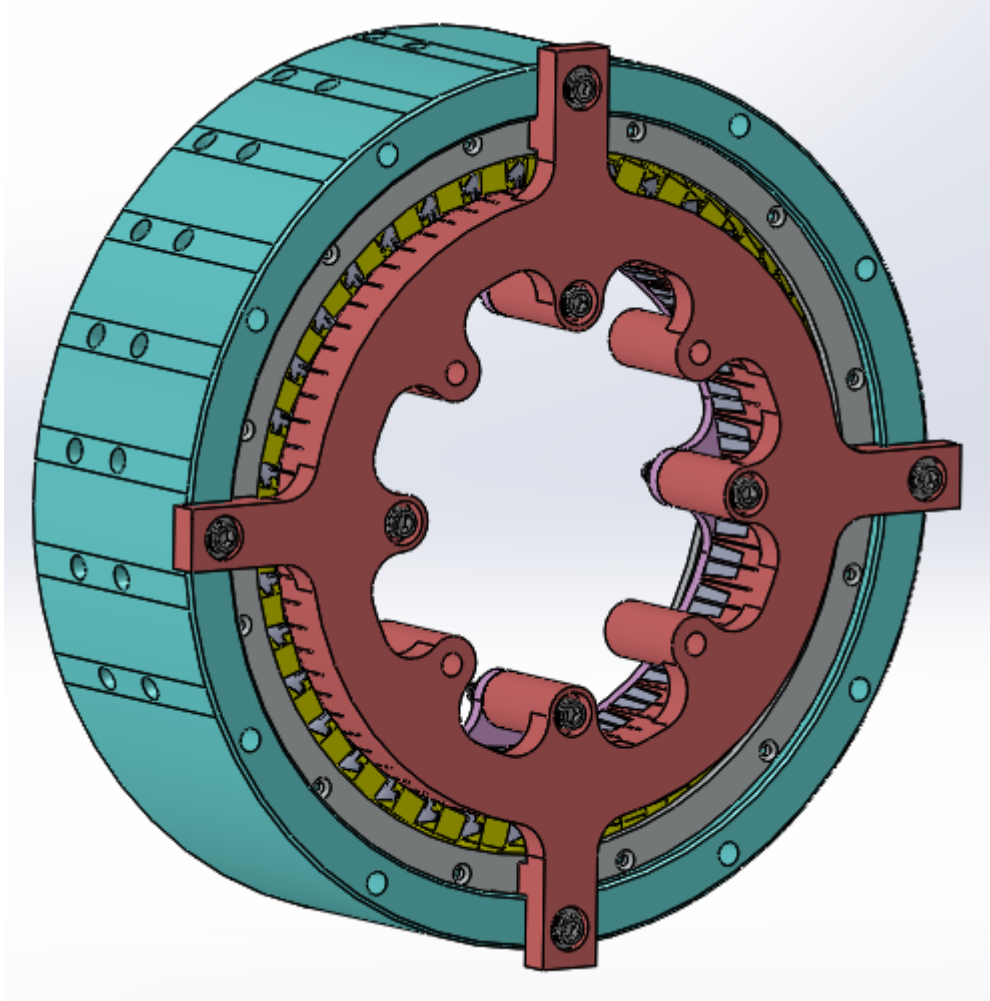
Surface Treatment Assembly Attached to Compressor Casing
